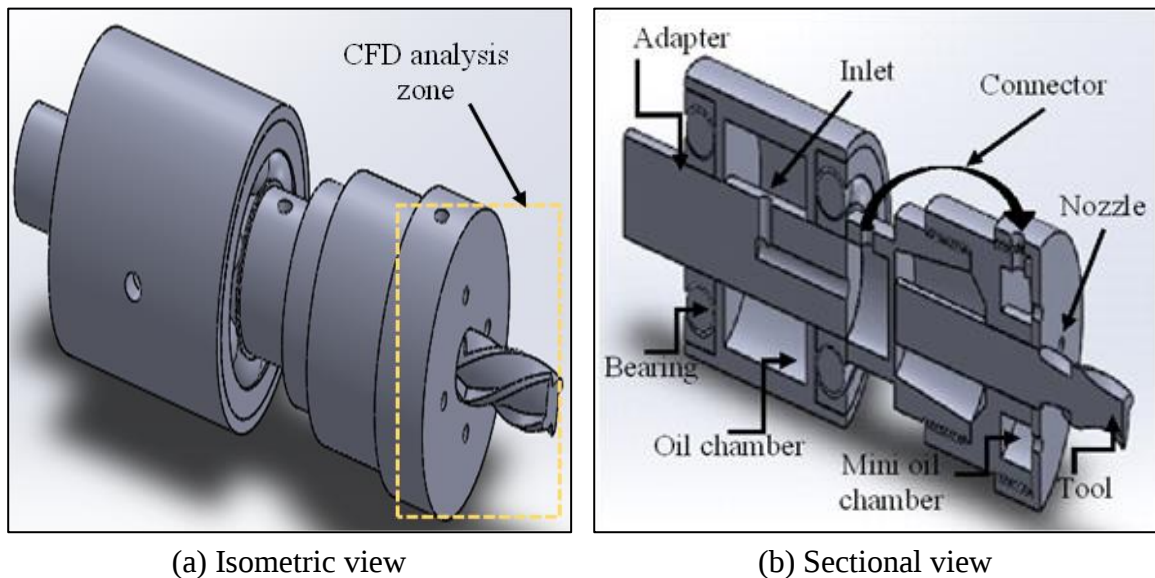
CAD drawing of the designed rotary liquid applicator
